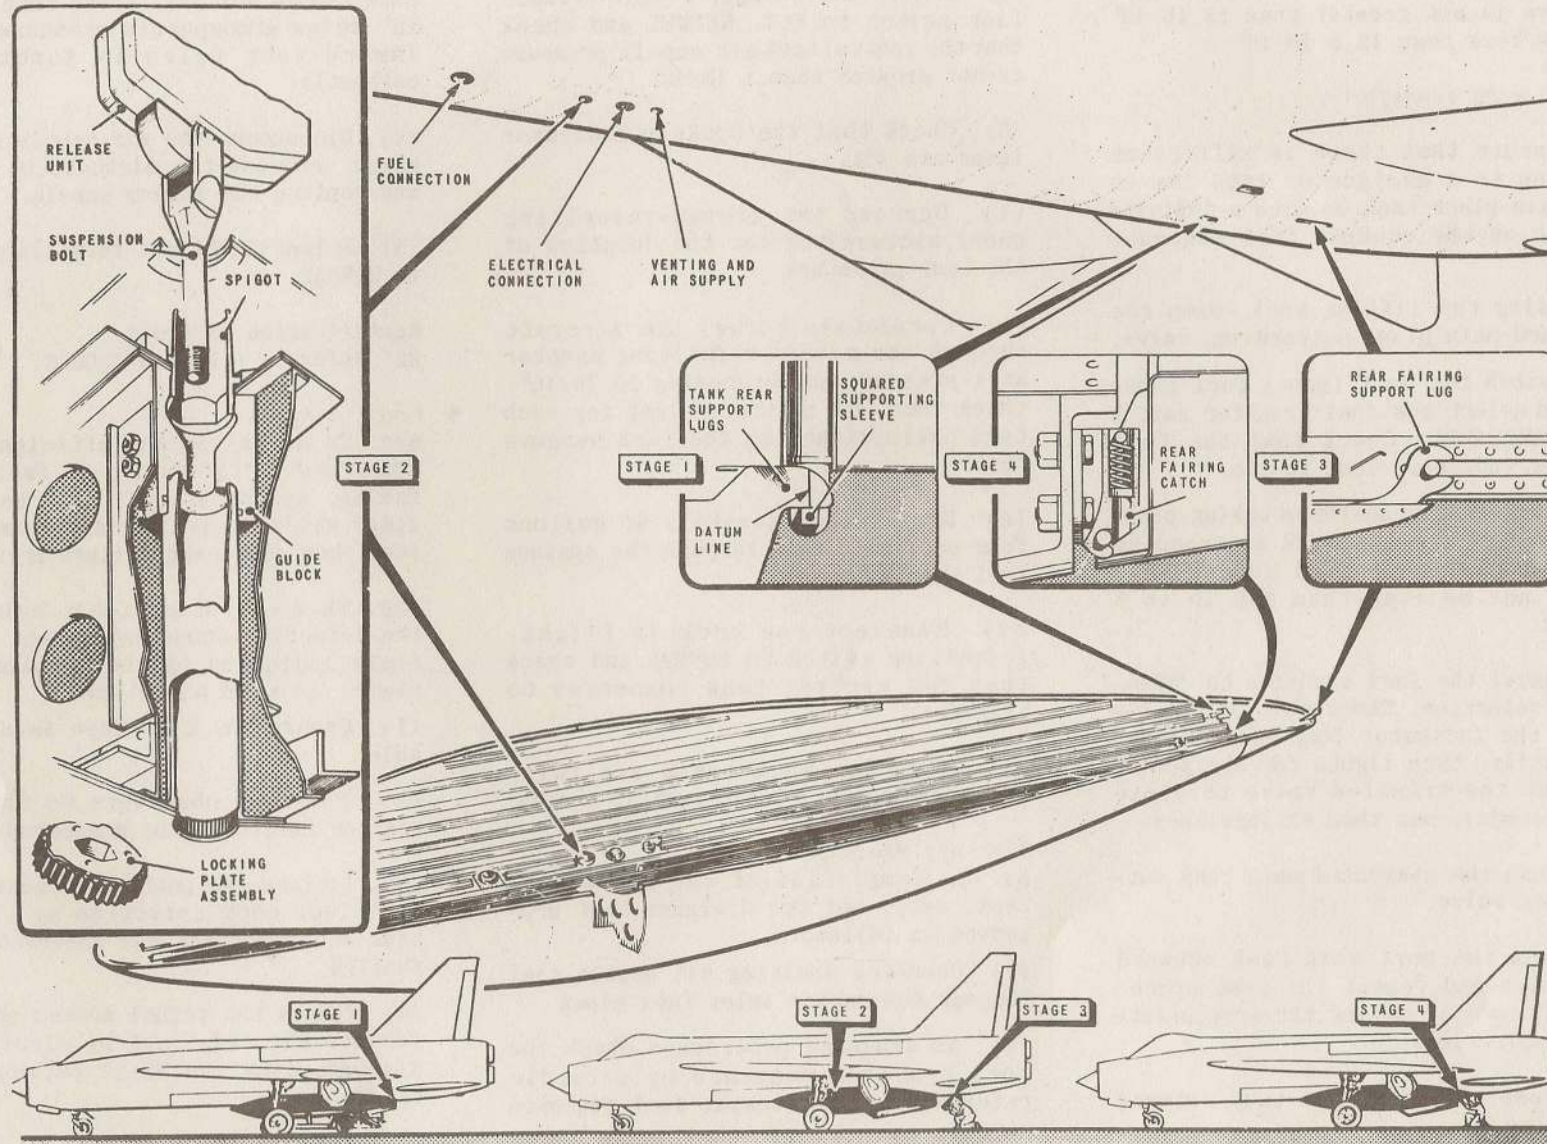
VENTRAL TANK - REMOVAL AND ASSEMBLY
